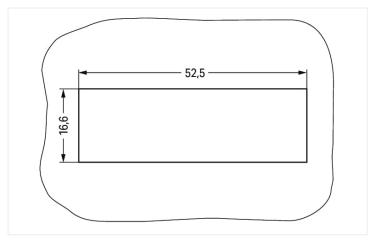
Plate thickness: 0.5 ... 2 mm Cutout tolerance: + 0.1 mm
